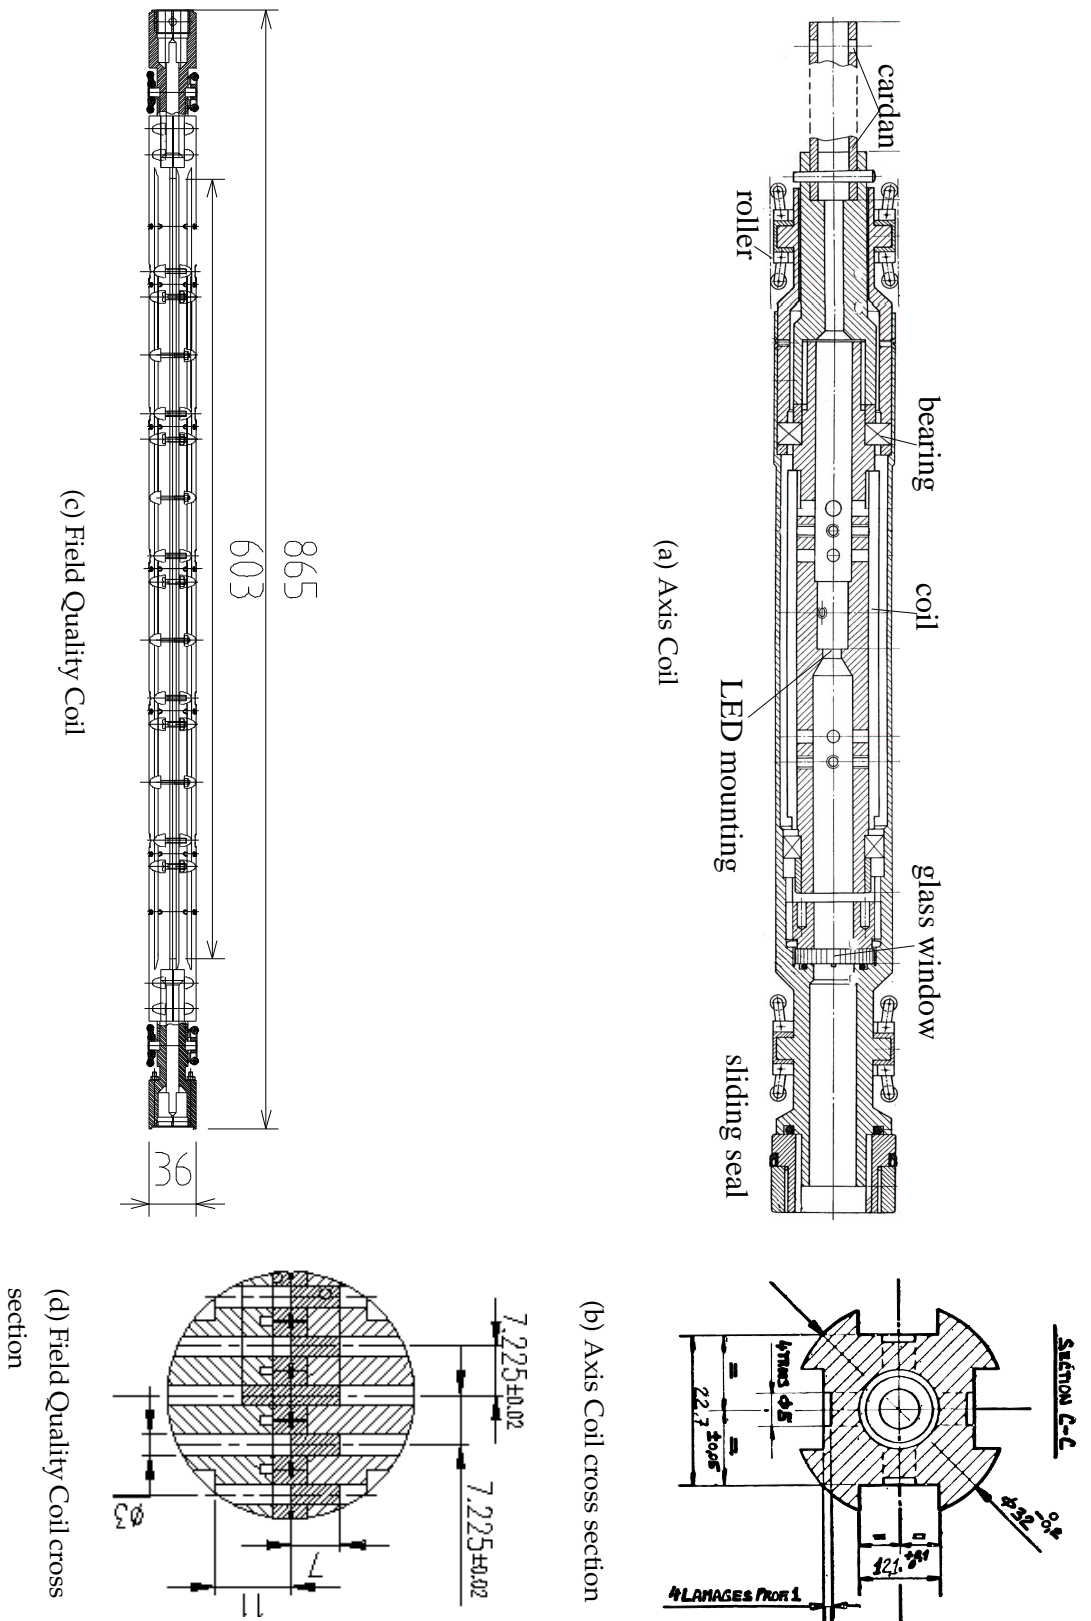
Technical drawing of the coils. Please note that the drawing are not to scale. All dimensions in millimetres. The cross section of the axis searching coil array shows nicely the layout of a tangential coil array body. The coil body gaps support the coils. The field quality coil is much longer than the axis searching coil. The cross section of the field quality coil shows the typical radial coil body. Two half cylinders support the measuring coils in the middle. The harmonic coil length differs slightly from the length given in Table 3.1 as here the outer length of the coil body is shown, in the aforementioned table the inner length is given. The bearings are made of ceramic. The coil bodies are made of Vetrest. The glass window is made of BK7. Its surfaces are planar with an optical quality of $\lambda/10$. The LED is mounted in the middle of the axis searching coil.
